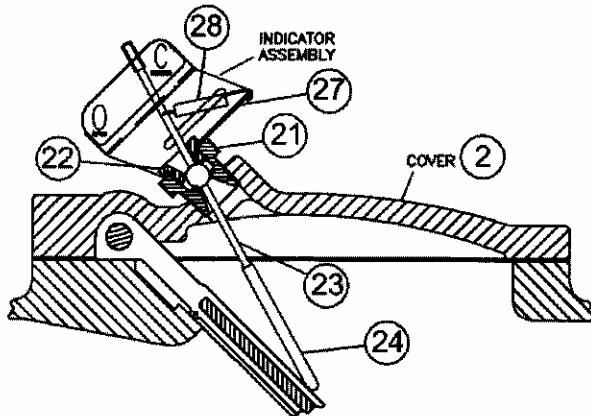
MECHANICAL INDICATOR ASSEMBLY
